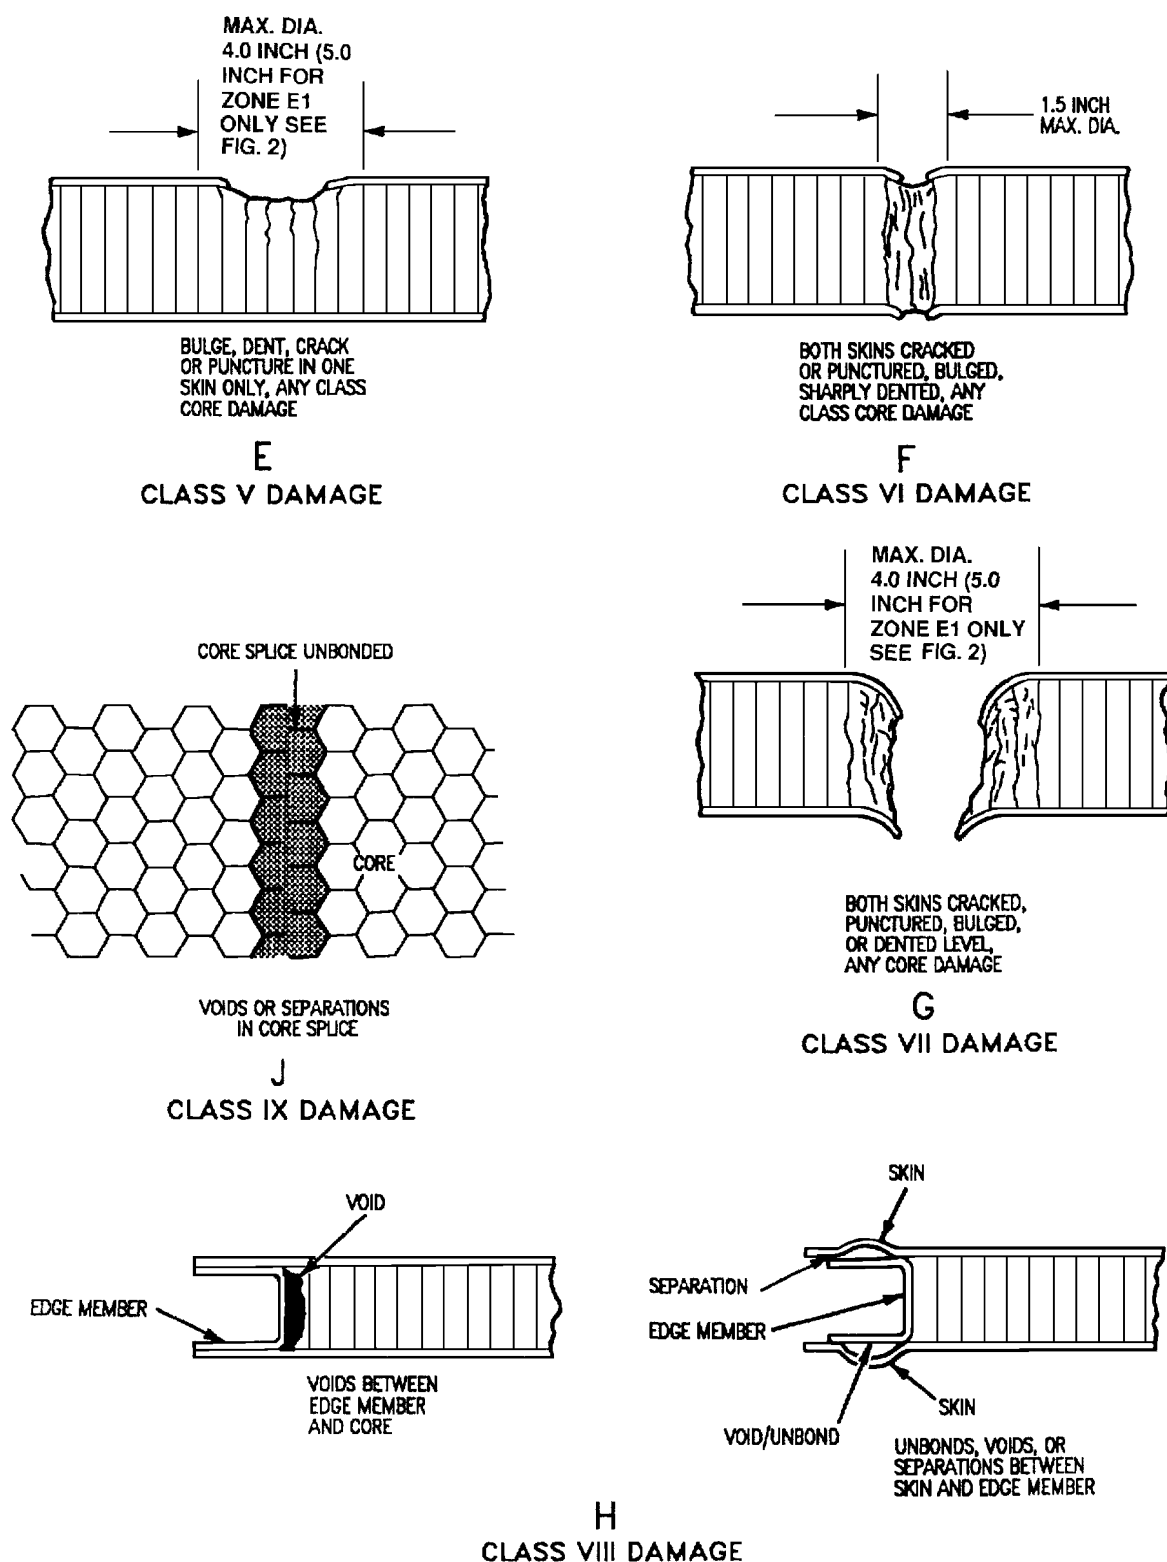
Repairable Damage, Aluminum Skin and Aluminum Honeycomb Core
